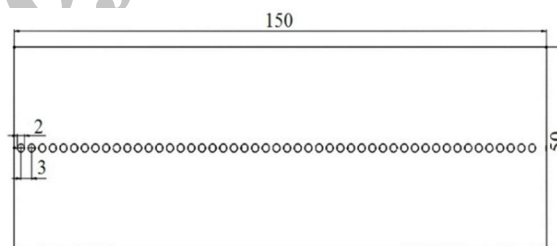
Schematic of Al 2024 sheet with given dimensional and holes
